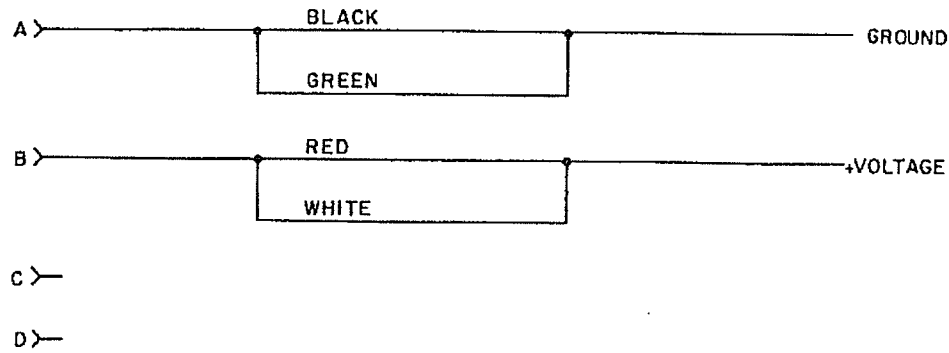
Cable Assembly CX-4720/VRC, Schematic Diagram
